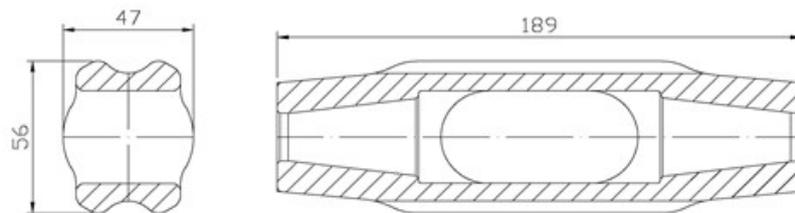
SK 6-1 SL Spring loaded coupler body dimensions
